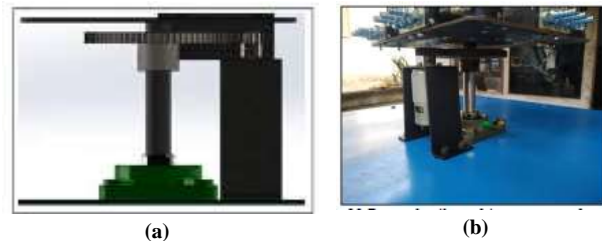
(a) Drive mechanical design; (b) drive mechanics.
